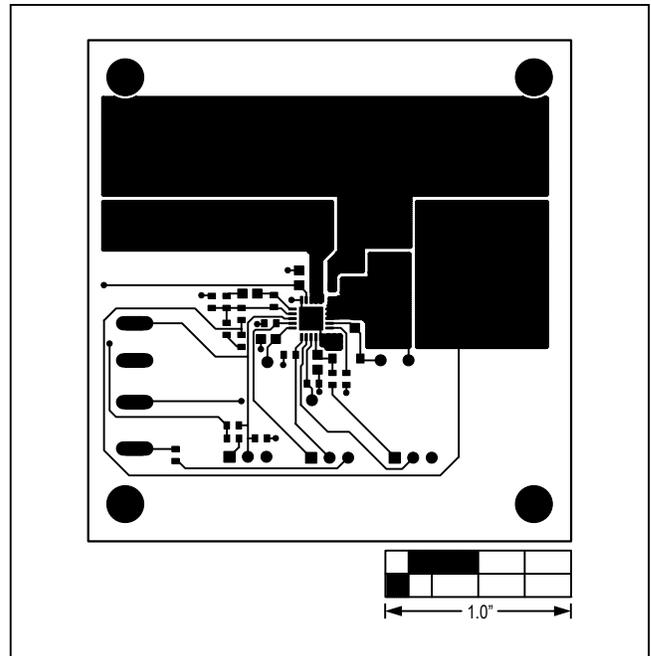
MAX15020 EV Kit PCB Layout—Component Side
